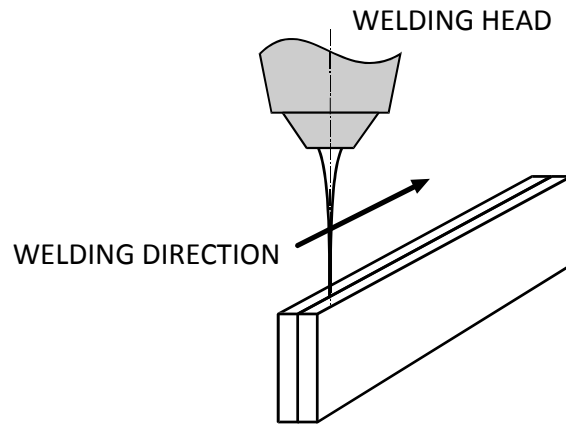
Laser welding in edge joint configuration
